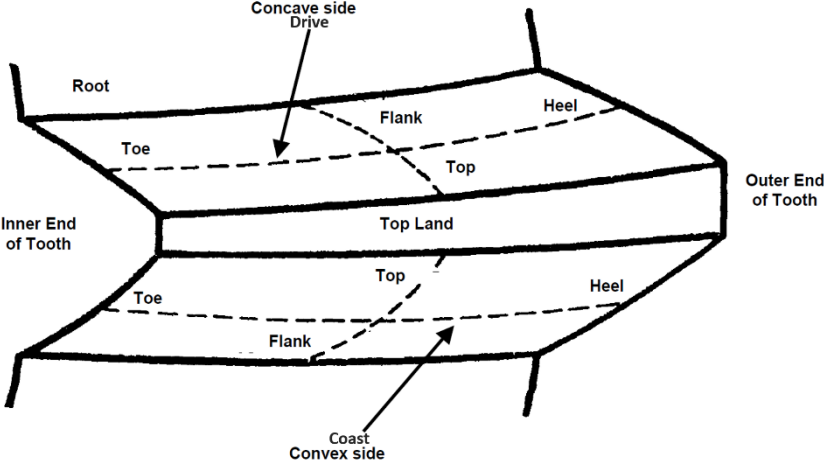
Tooth nomenclature of a spiral bevel gear [1]
